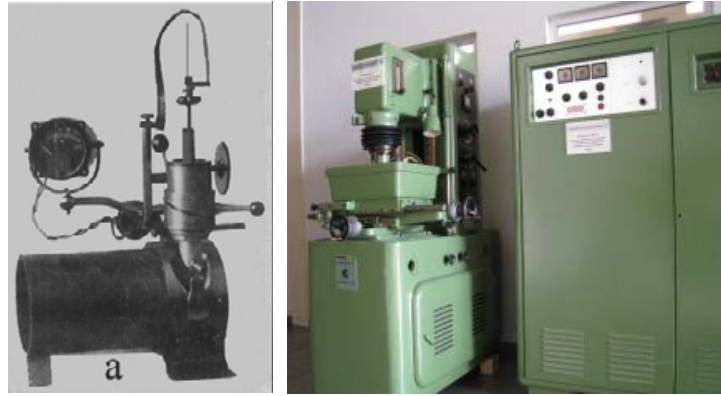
From left to right: the first known electrical discharge device for removal of broken tools (early 40-ies) [2], De Eleroda D1 of Charmilles Technologies- the first commercial EDM machine (photo by Reinold Tomberg).
